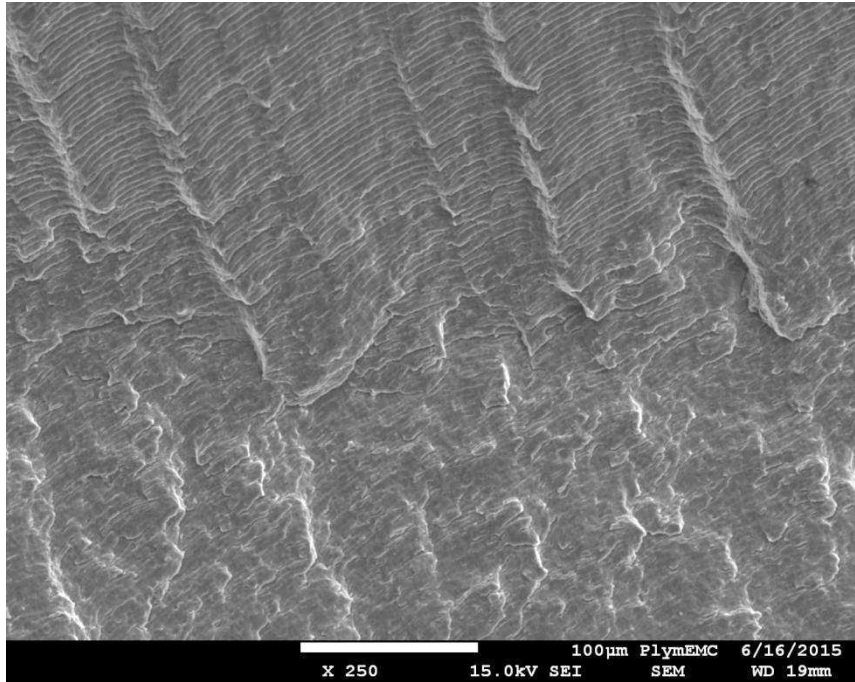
Clear evidence of initiation of the primary fatigue crack from the outer edge of specimen IPh2 can be seen at the upper right hand corner in this image.
